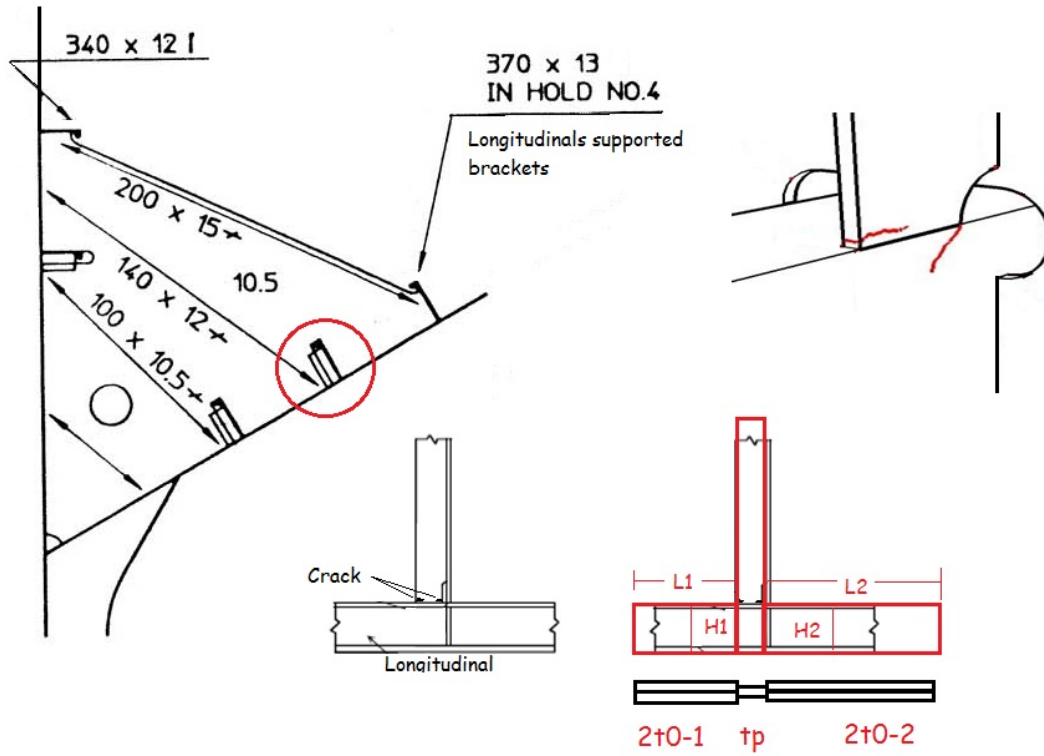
Situation II of Cracks happen at the connection of the flange and web plate in lowest longitudinal and vertical stiffener (pressures loadings),
